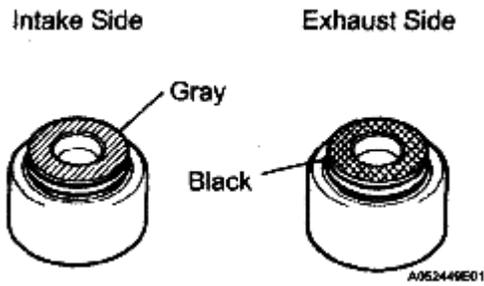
Identifying Intake And Exhaust Valve Stem Oil Seal
